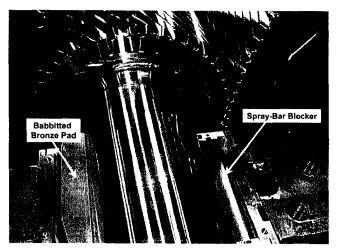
54,000 HP Pinion Bearing, Lower Half in Gear Case.
